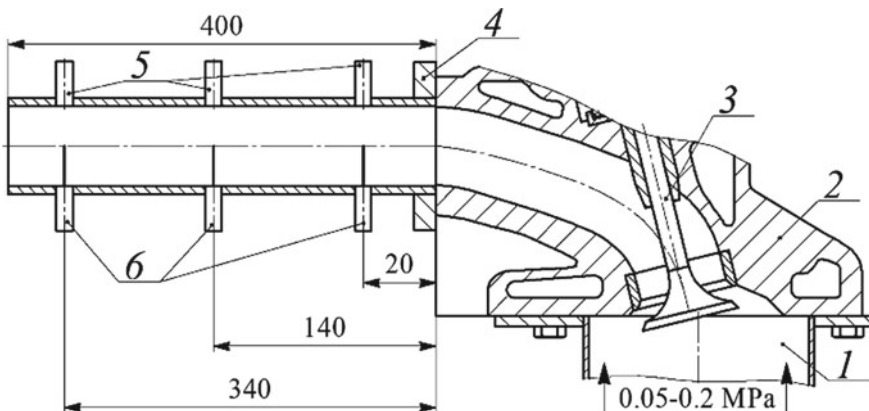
Longitudinal section of the working section of the piston engine exhaust system: 1—cylinder (cavity), 2—engine block head, 3—the exhaust valve, 4—exhaust pipe under investigation, 5—thermo-anemometer sensors for measuring local heat transfer, 6—thermo-anemometer sensors for measuring the air flow velocity
